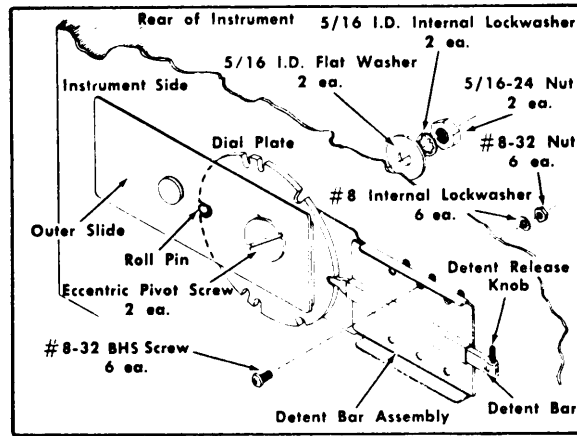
Details for mounting the left chassis section to the instrument (supplied with optional slide-out tracks).
